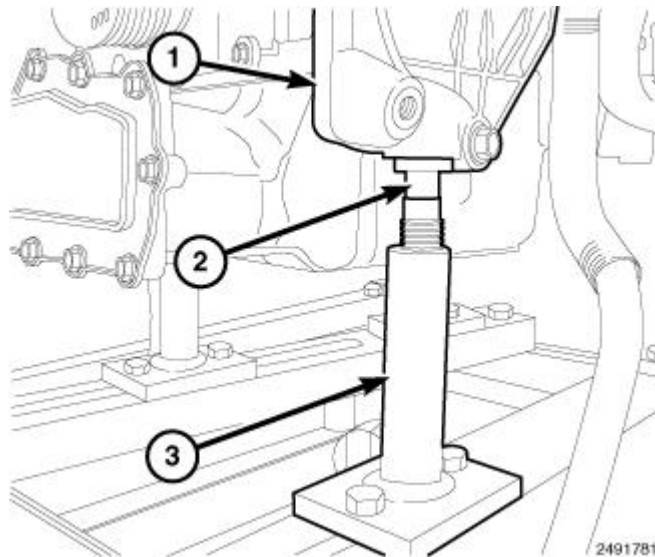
A/C Compressor Mounting Bracket, Cradle Post & Adapter
